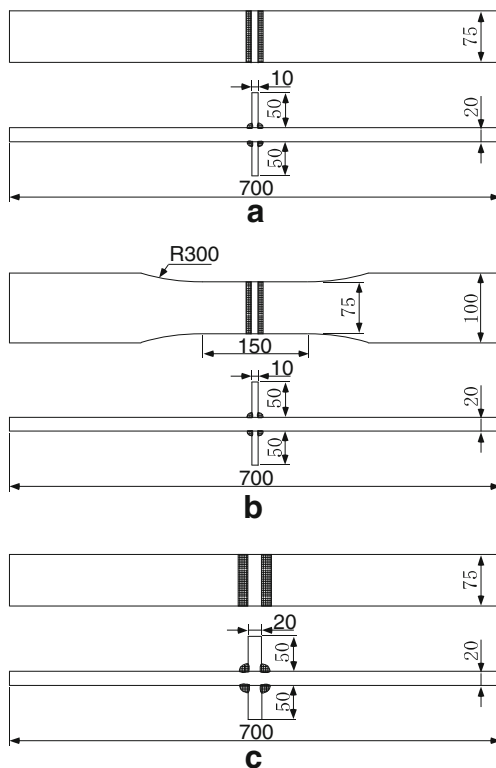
Geometries of specimens: a as-welded, b UIT, c grinding
